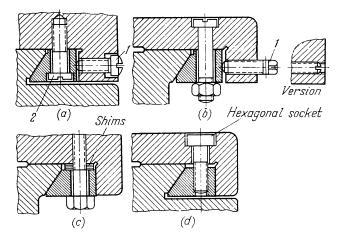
Gibs of trapezoidal cross section for dovetail ways
